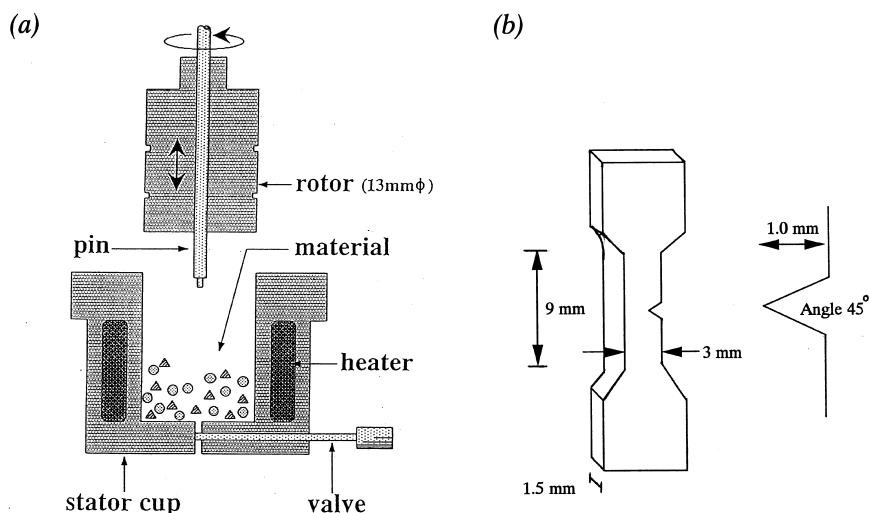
(a) Mini-Max Molder and (b) dimension of notched dumbbell specimen.
